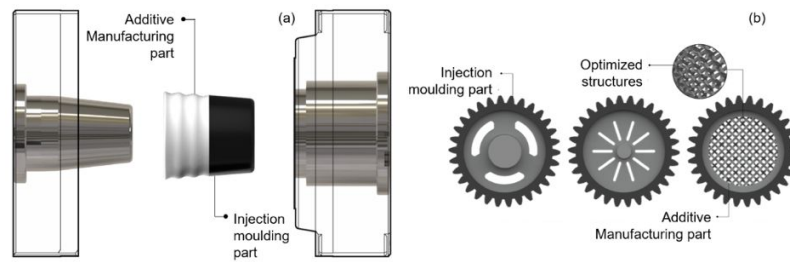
CAD representation of a hybrid: (a) cup with detail of the mould and (b) toothed gear wheels.
